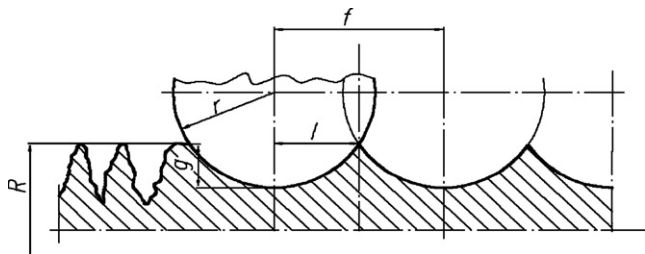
Possibility of burnisher working surface multiplication:  $d$  – diameter of the tool,  $R$  – radius of the workpiece.
